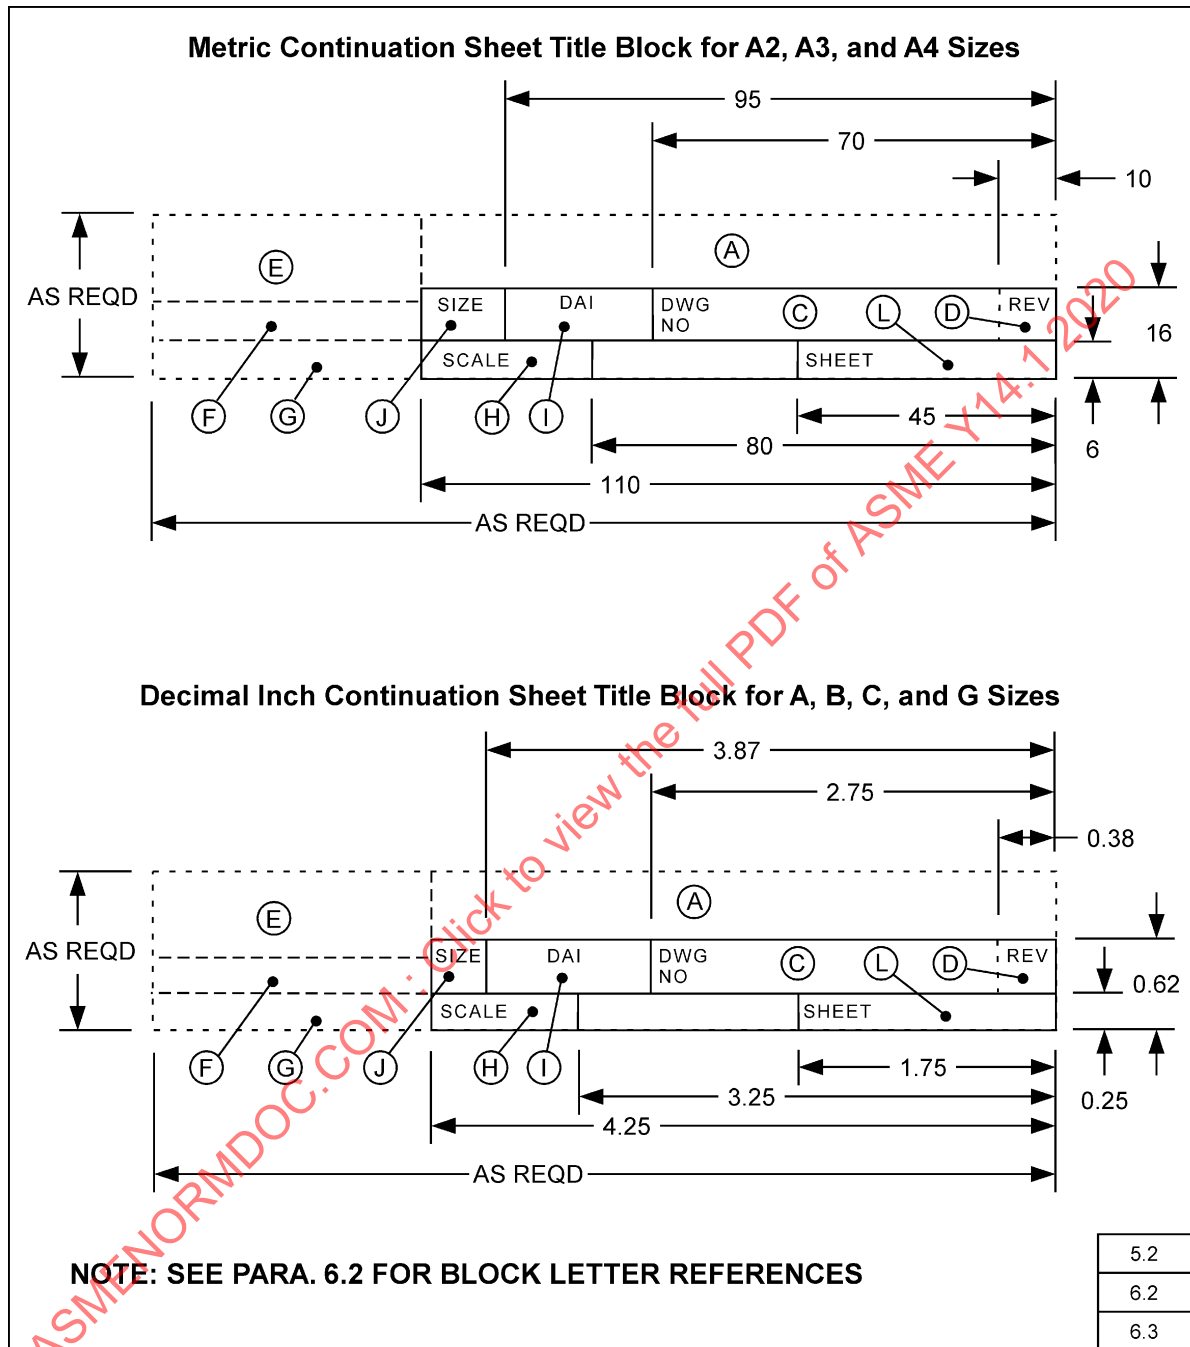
Continuation Sheet Title Block for Smaller Drawing Sheet Size Formats
